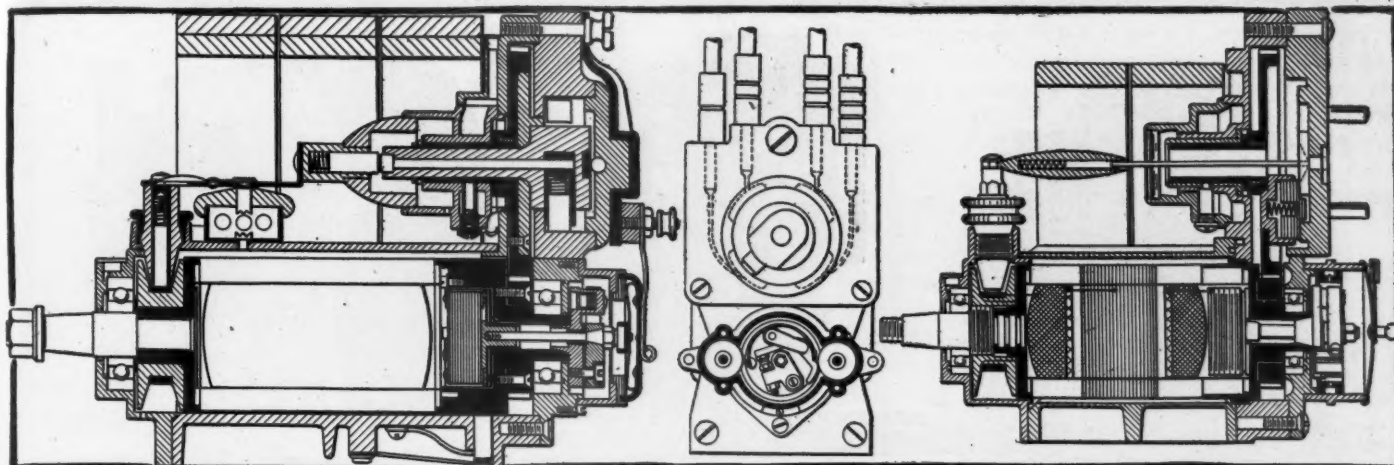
SECTION AND END VIEW OF LARGE BOSCH HIGH-TENSION MAGNETO
